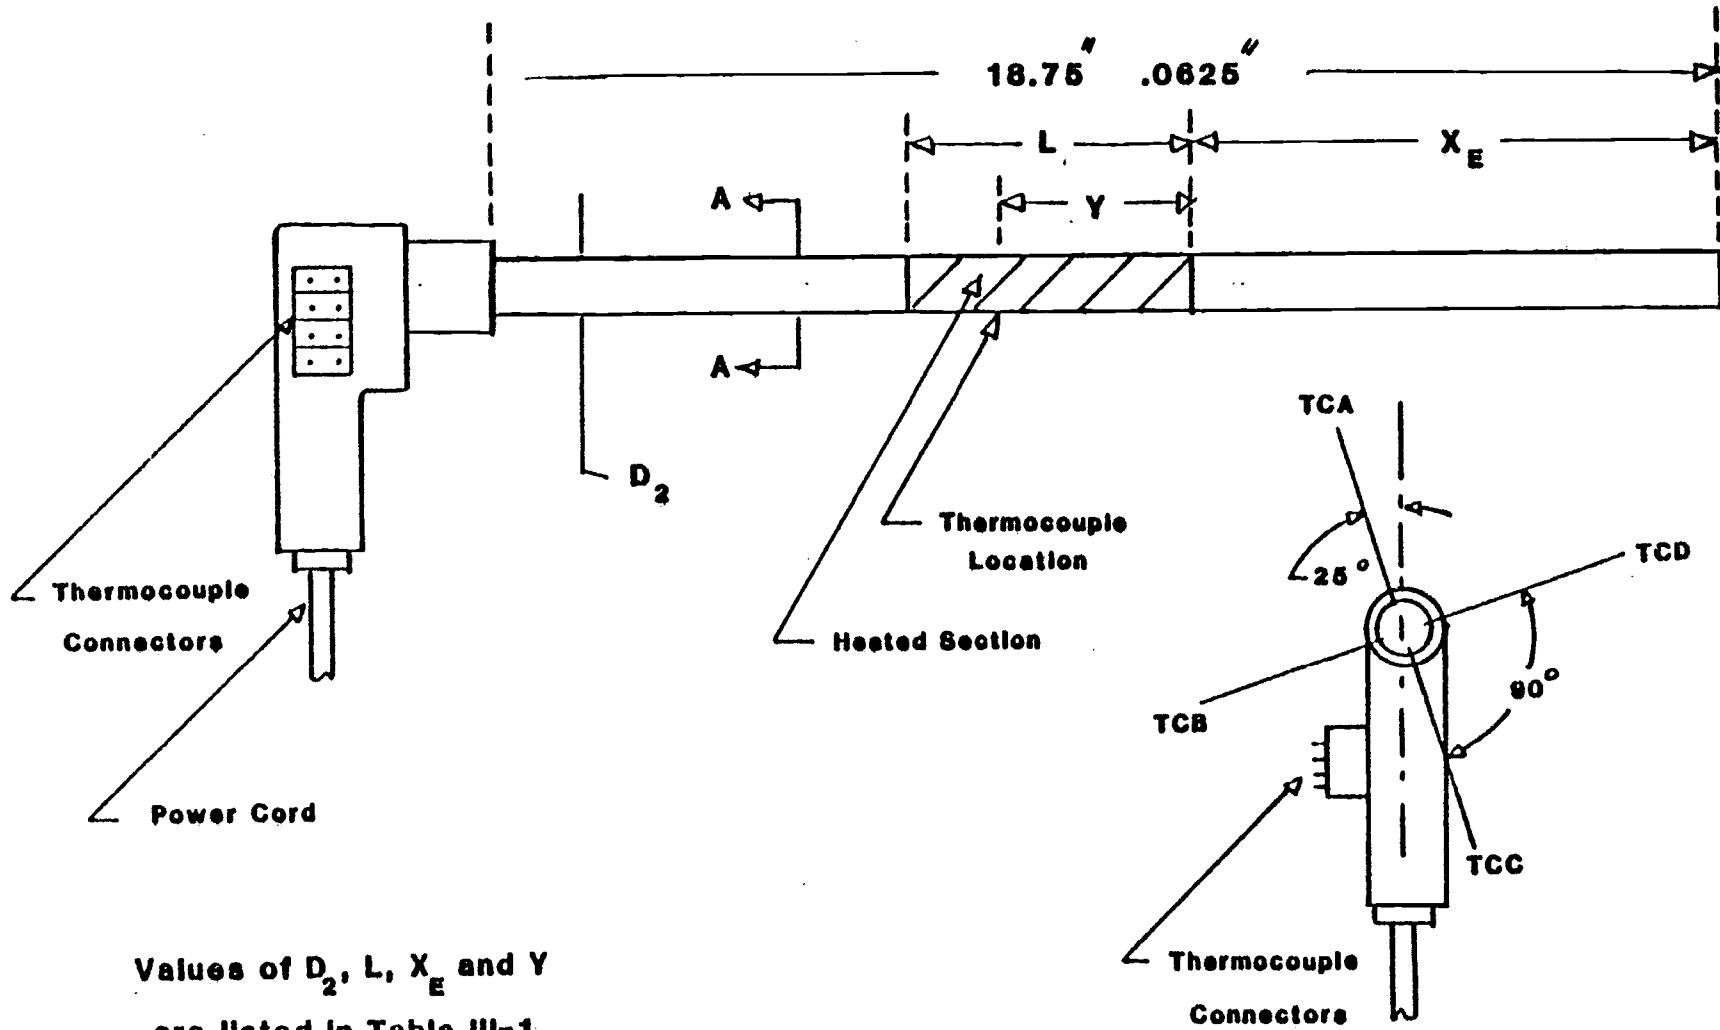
HEATER ROD HEATED SECTION AND THERMOCOUPLE LOCATION
